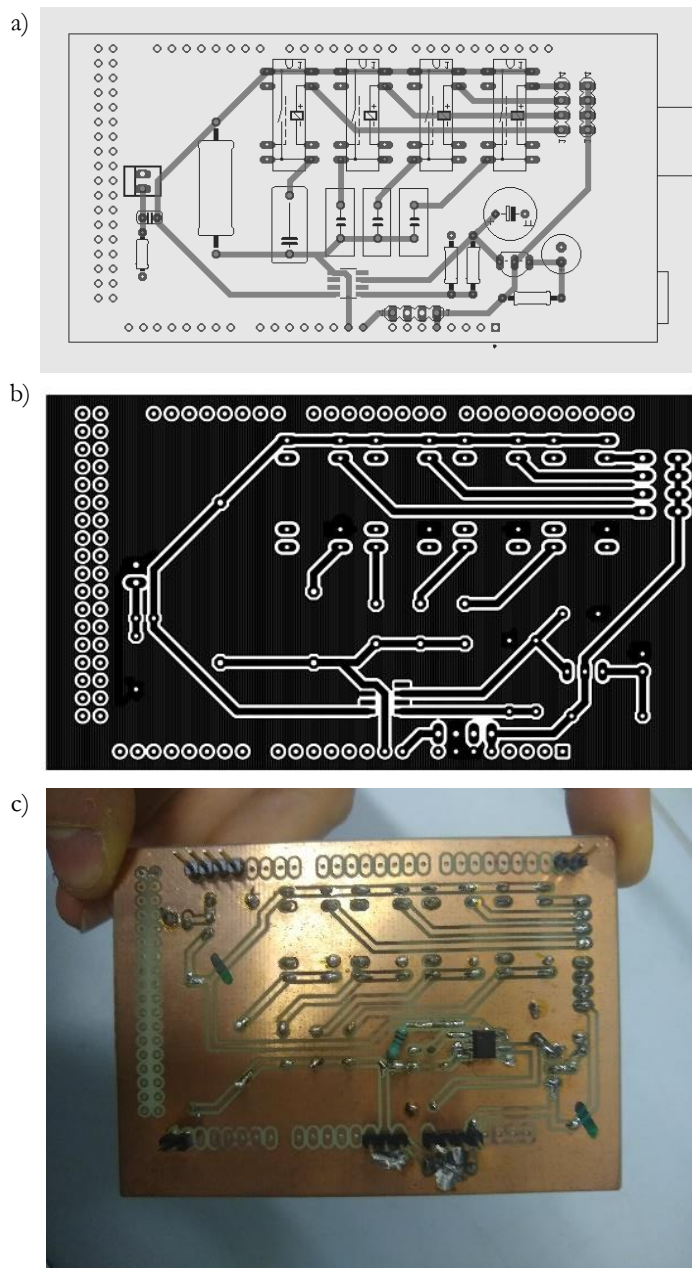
a) CAD design of the PCB, b) Photolithography mask, c) Final realization of the board photoengraved on a copper board.
